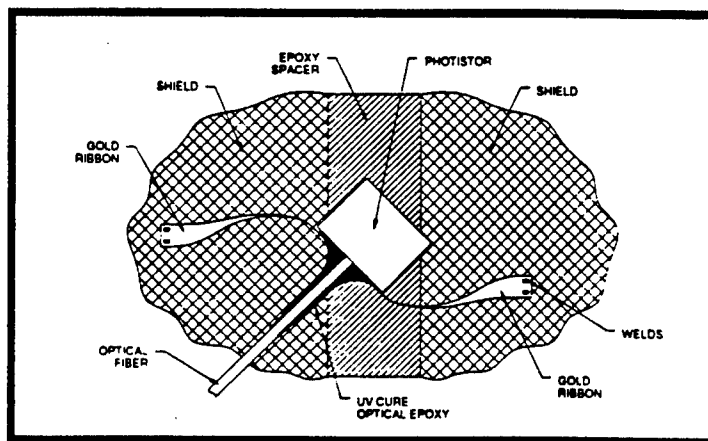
PHOTISTOR™ SWITCH INSTALLATION - TOP
